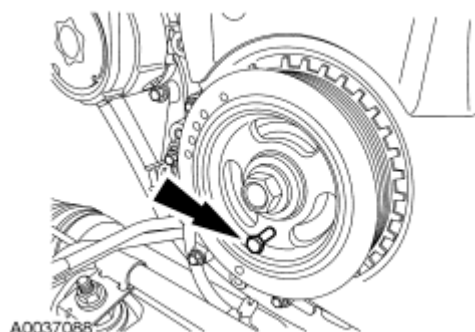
Installing Bolt Through Crankshaft Pulley And Thread It Into Front Cover
